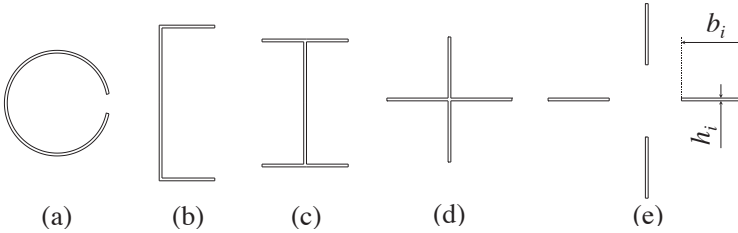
Thin-walled open cross sections. Torsion bars of such cross section resist bending more than torsion, making it possible to create joints with one rotational DOF.
